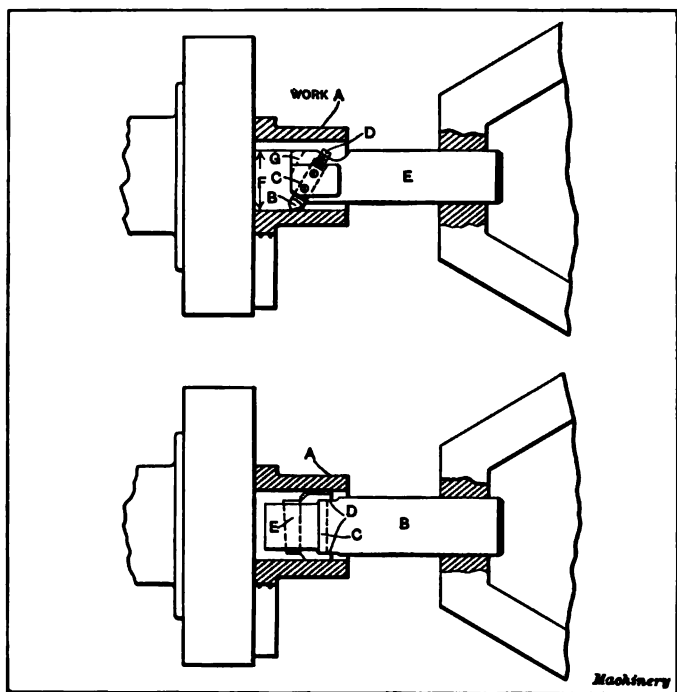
(Upper View) Boring-bar with Adjustable Cutter; (Lower View) Boring-bar with Double-ended Cutter
